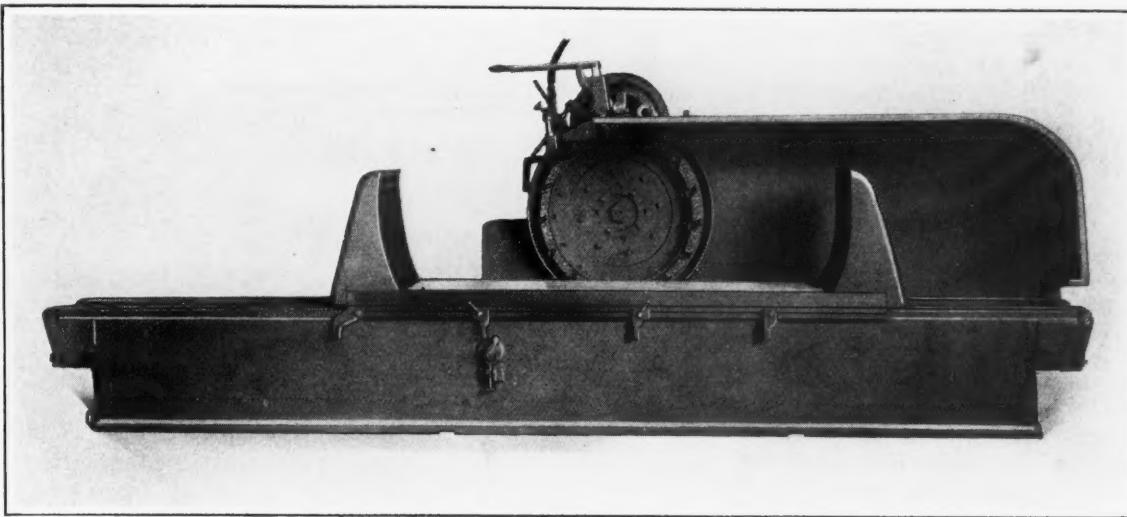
Hanchett Face Grinding Machine with Hydraulically Operated Table and Grinding Wheel
